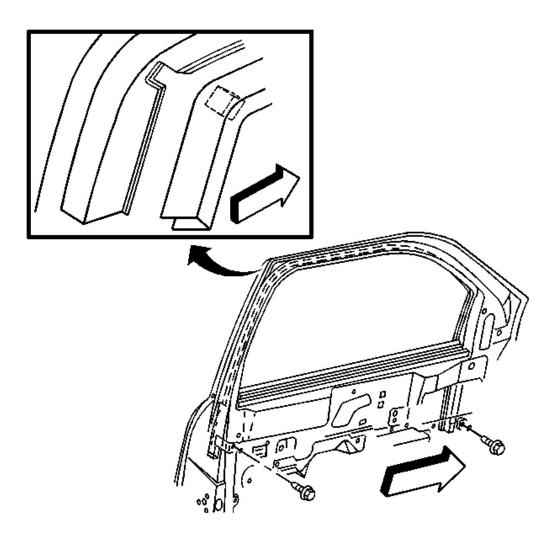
Identifying Weatherstrip/Run Channel Courtesy of GENERAL MOTORS CORP.
